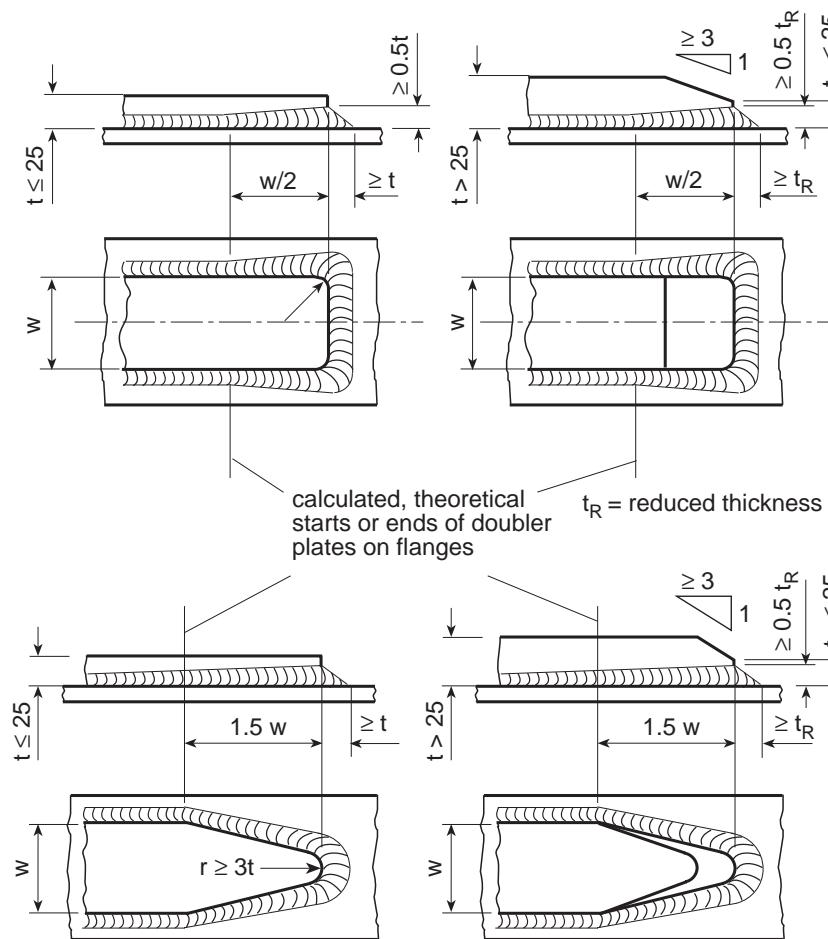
Configuration and welding of the ends of doubler plates on flanges
